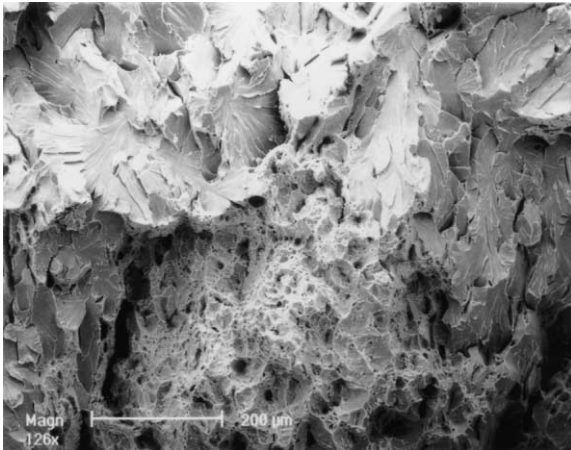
Fracture surface of decarburized 1010 steel at  $-100\text{ }^{\circ}\text{C}$ , well above its brittle-to-ductile transition temperature, showing a mixture of cleavage and ductile dimple fracture.
